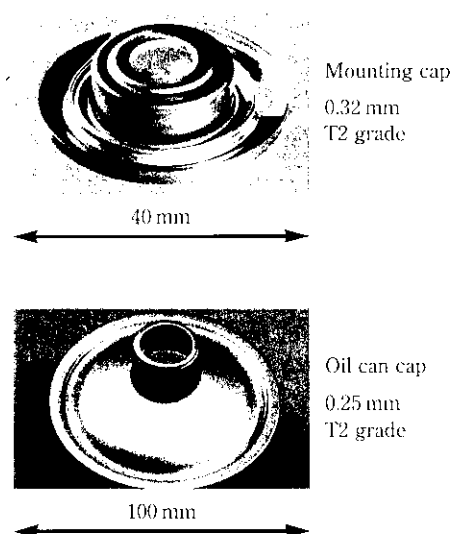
Examples of formed parts using formable thin-gauge steel sheets
